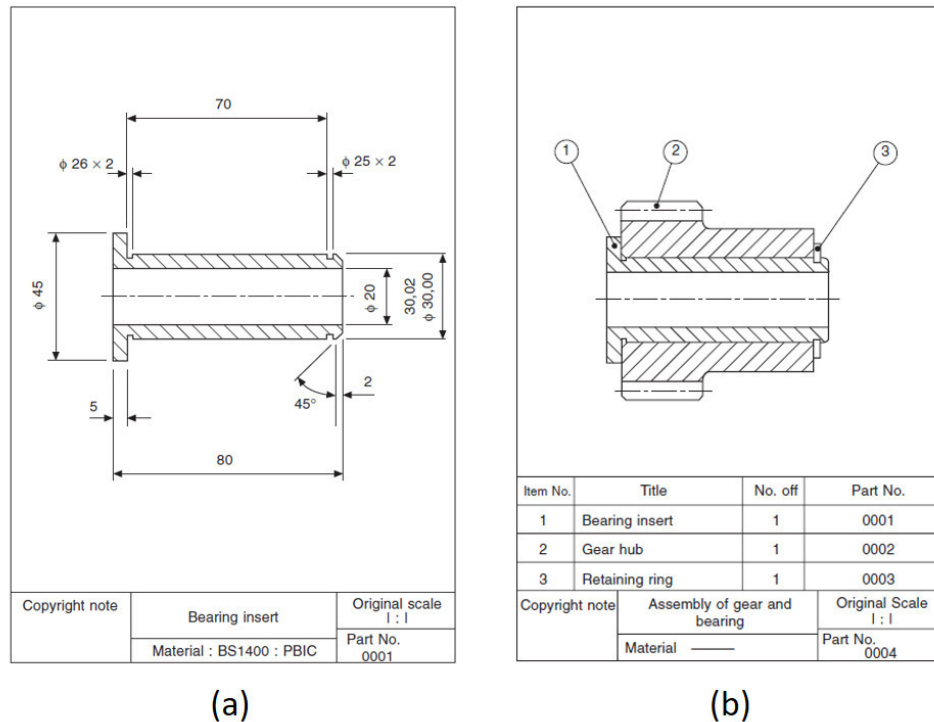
Examples of part drawing (a) and assembly drawing (b). Adapted from [103].
